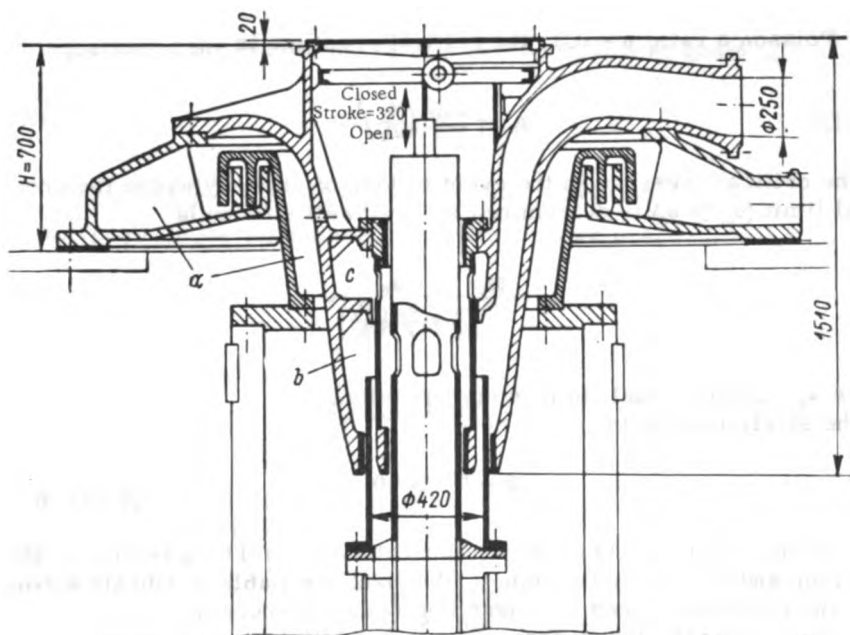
Oil-supply head of reduced size located partly inside the shaft
